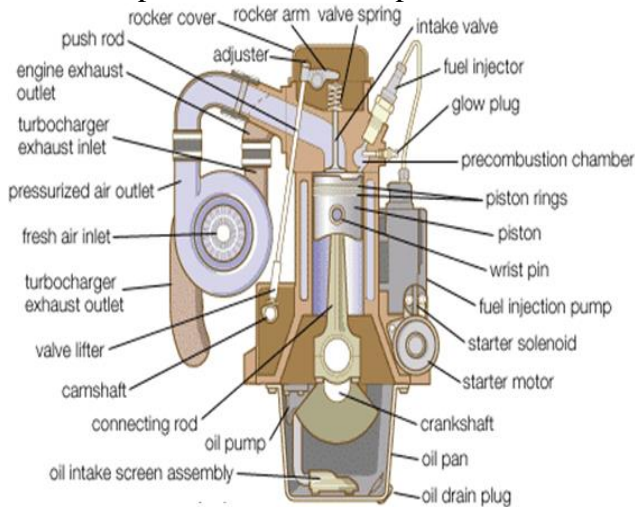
Moving Parts of Marine Diesel Engine (Retrieved from http://www.ystinjectors.com/html_news/?15-Major-Types-Of-Diesel-Engines-15.html)
